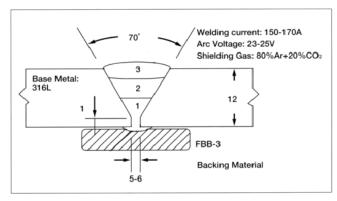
An example of the welding procedure used for a storage tank of a chemical tanker. This is a one-side welding process using the FBB-3 refractory backing material in vertical-up position.
